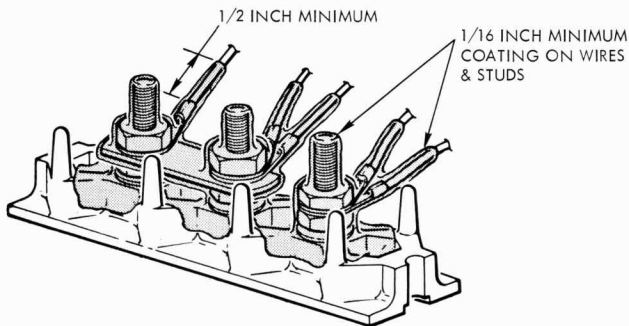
MINIMUM COATING FOR NAS1066 TERMINAL STRIP
